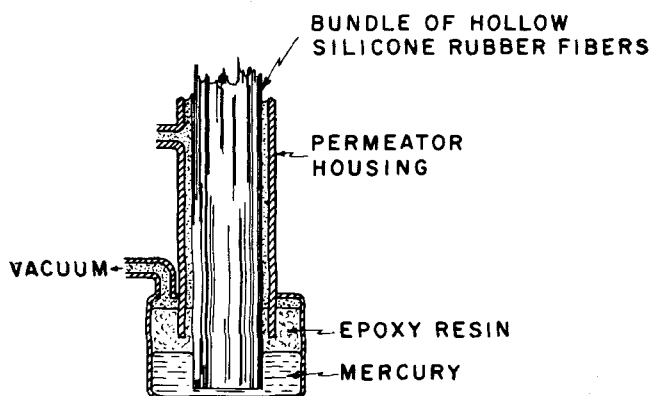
Method of casting headers (tube sheets) for bundles of hollow silicone rubber fibers.
